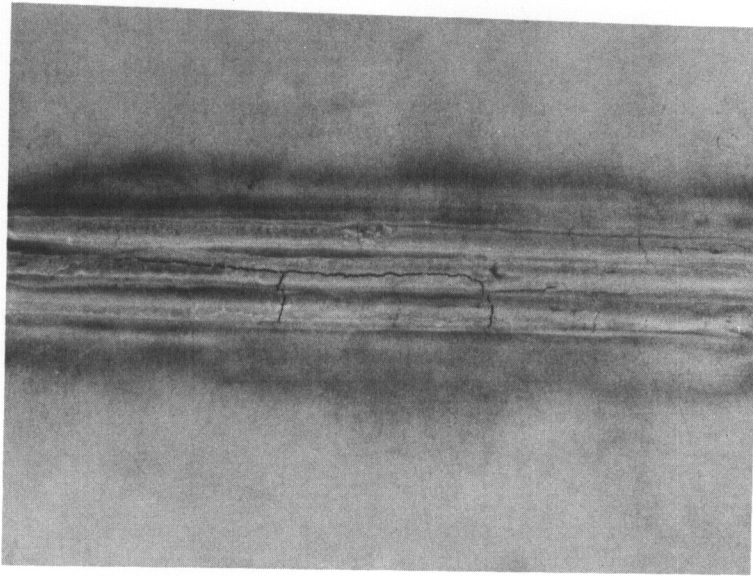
Three bead weld in AD30 steel sheet. Electric arc method, no filler rod. 2/3 actual size.
